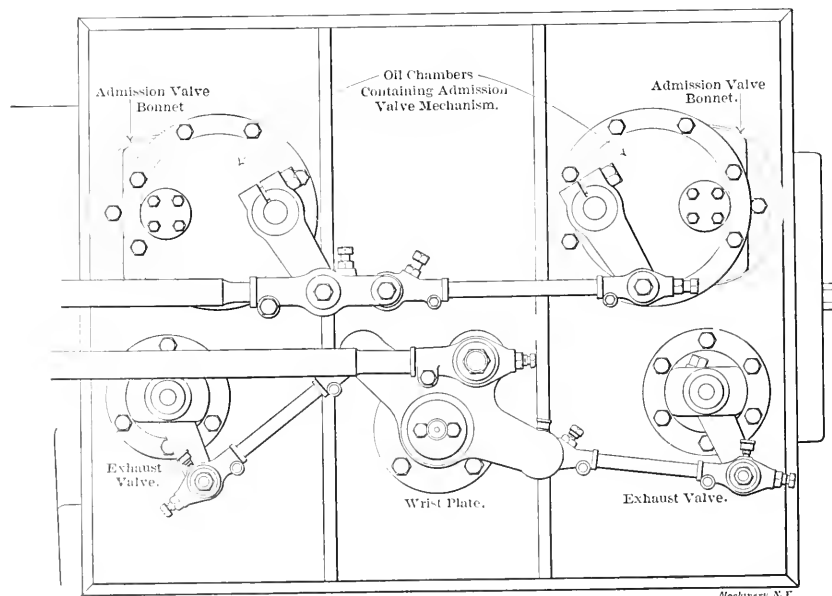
Diagram showing General Appearance of New Valve Gear.
